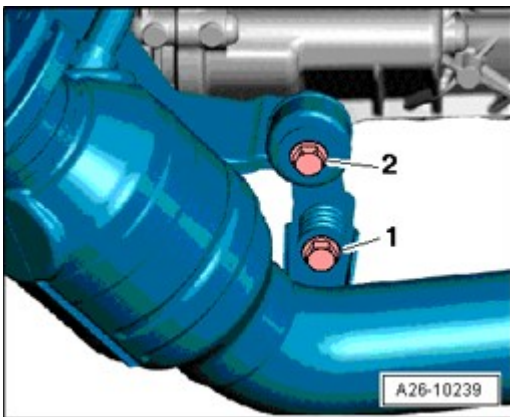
Removing Bolt At Left Front Exhaust Pipe Strap
